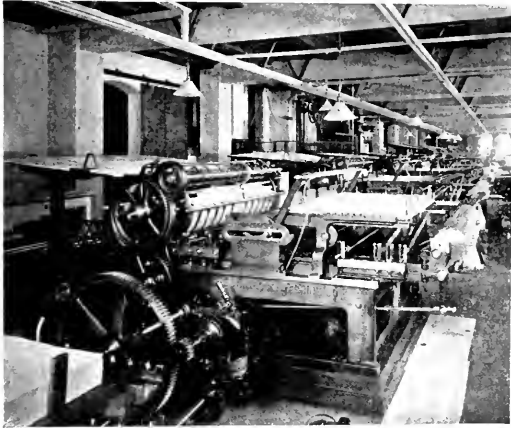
A LINE OF TWELVE MOTOR-DRIVEN PRESSES.
